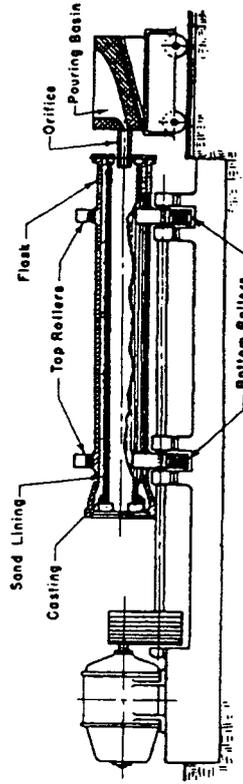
True Centrifugal Machine for Long-Tube Casting
